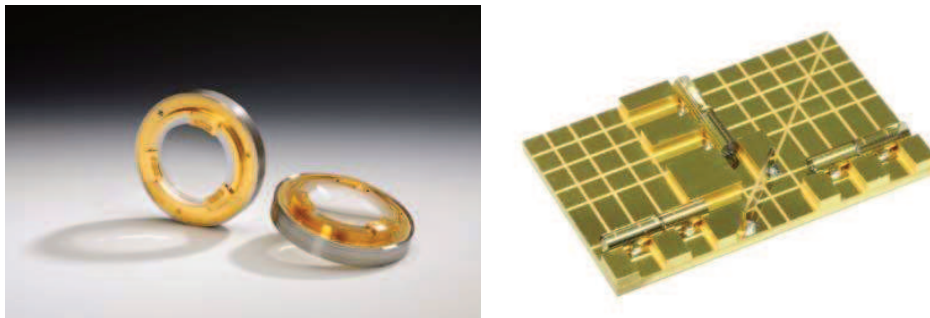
Examples of solderjet bumping assemblies. Left, lens mount geometry soldered with solderjet bumping technique [23]. Right, wavelength division multiplexing device for optical measurements assembled by similar means [21].
